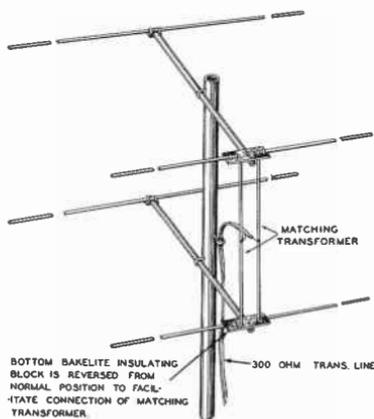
"H" Antenna Construction Using Two Supporting Arms.
